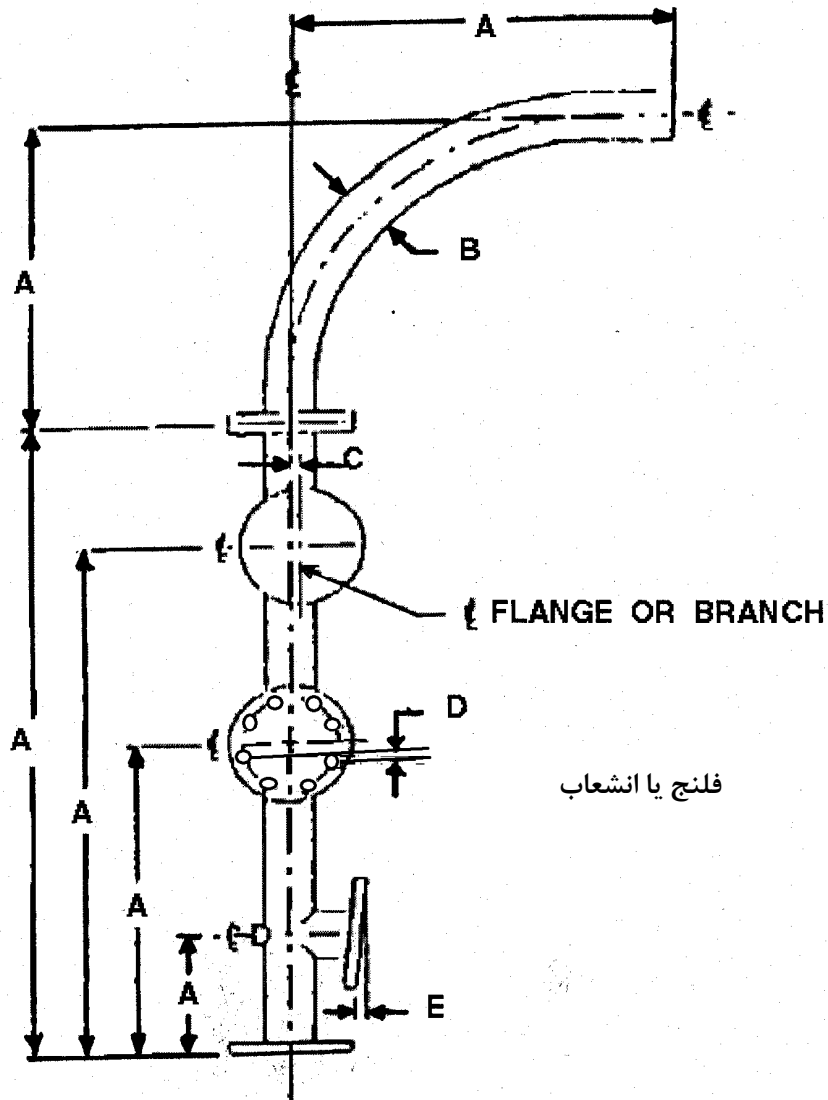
DIMENSIONAL TOLERANCES FOR FABRICATED PIPEWORK
